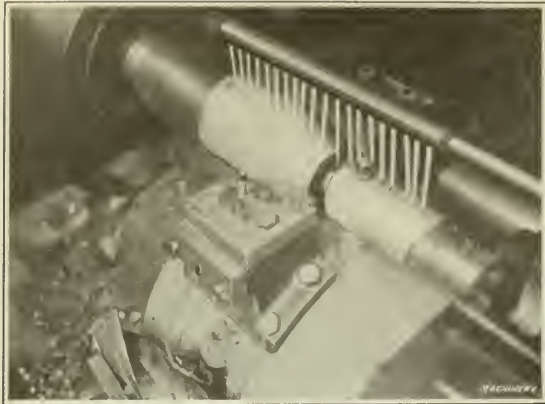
Pipe with Series of Holes to distribute Coolant to Tools on Shell Turning Lathe
